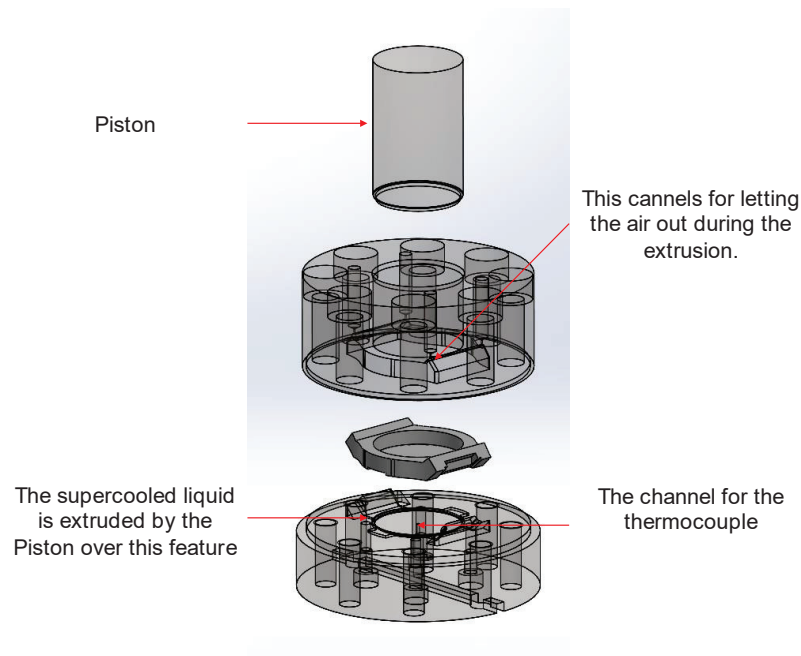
16 The assembly of the mould and the shape of the final work piece.
